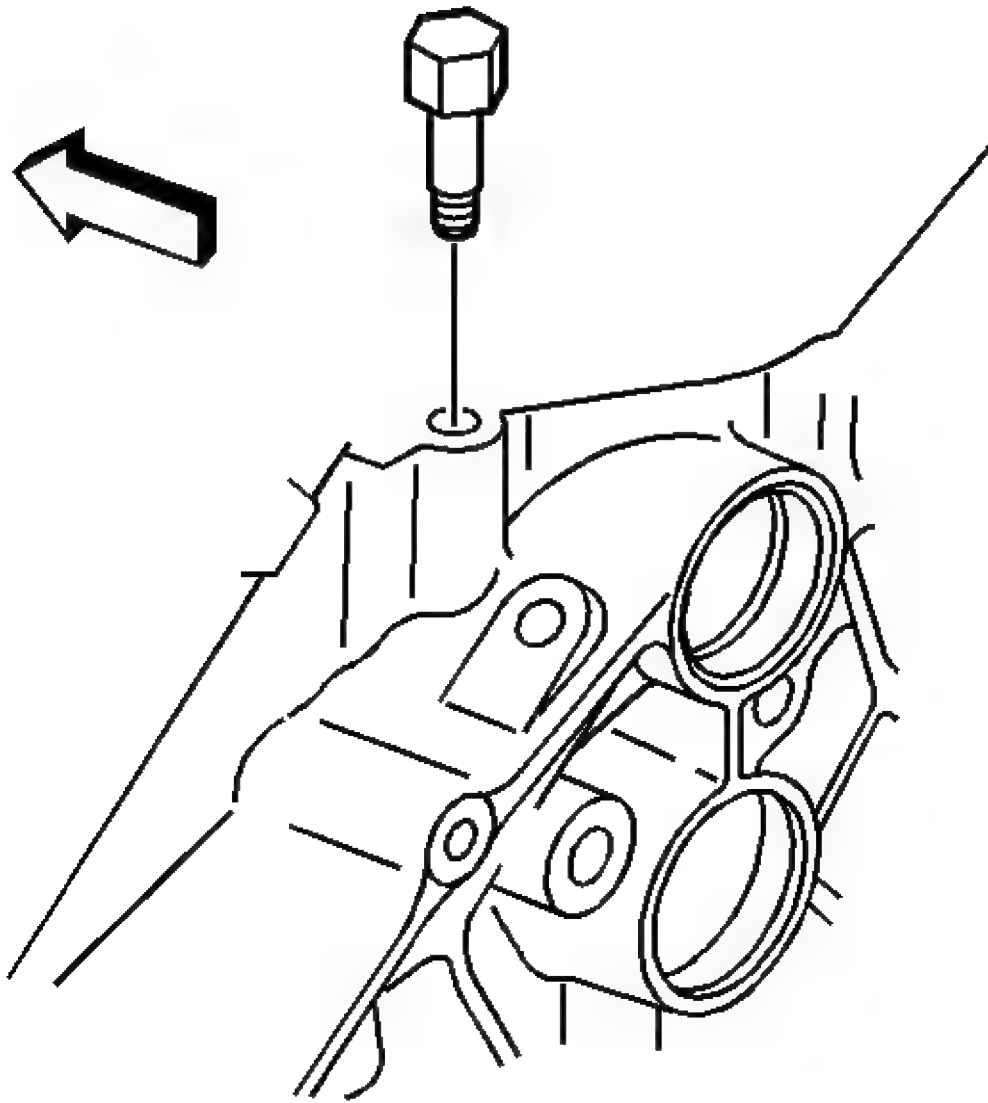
Locating Engine Oil Pressure Sensor Fitting
